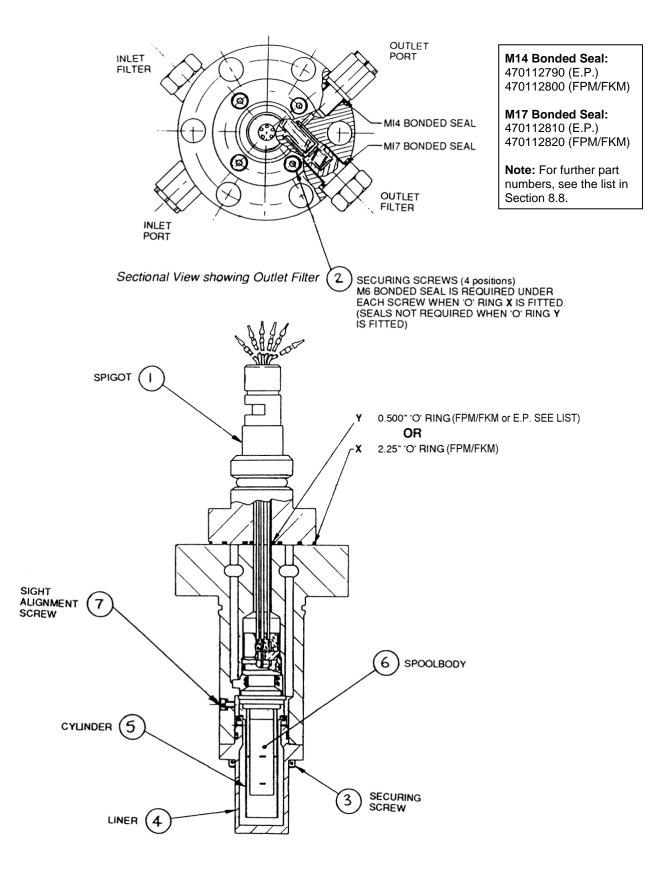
Sectional views of 78121/2/3/4 meters:
